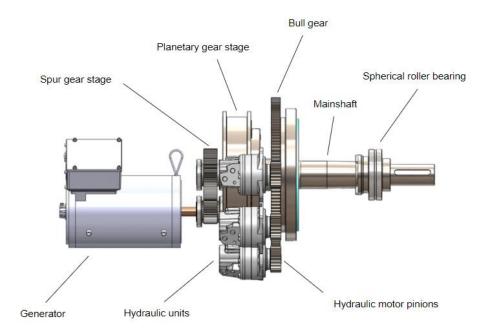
Drivetrain assembly with generator, gearbox and hydraulic drives (housing and sheave removed to show connection points)
